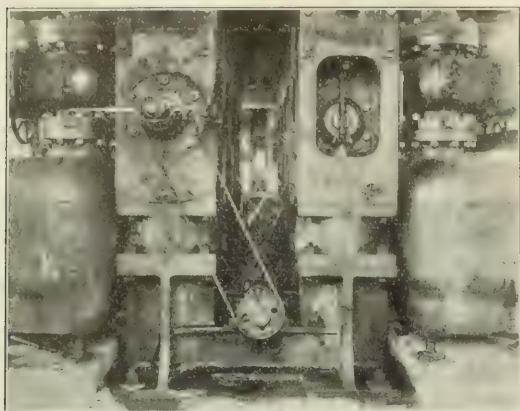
FIG. IX—DETAILS OF STIRRING ROD DRIVE
